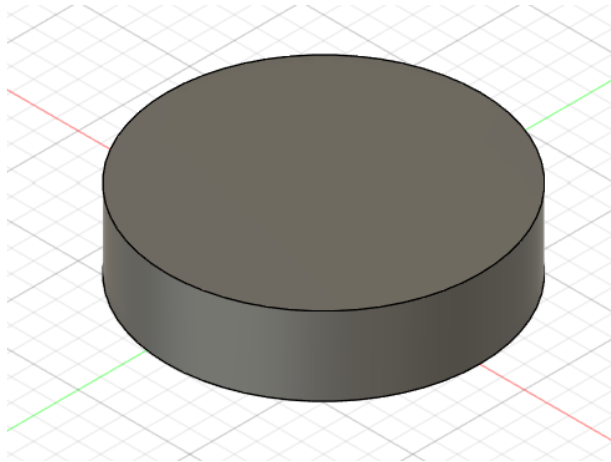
PVD QCM mask single part inner press. A thicker 3D printed part that fills the whole space of the mask. (thickness 3.5mm, radius 7mm)
